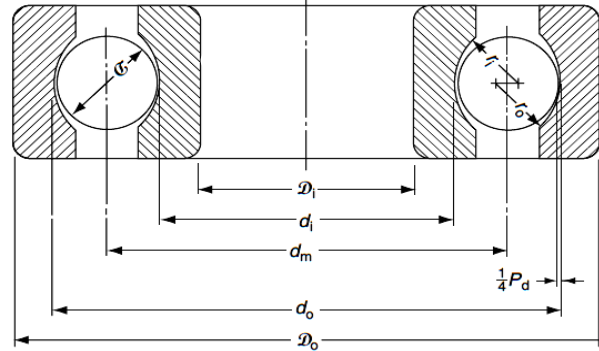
Geometry of the deep groove ball bearing 6004 [31]
